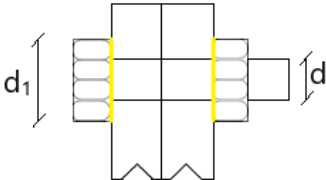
Highlighted mating surfaces between standard bolt and flanges
